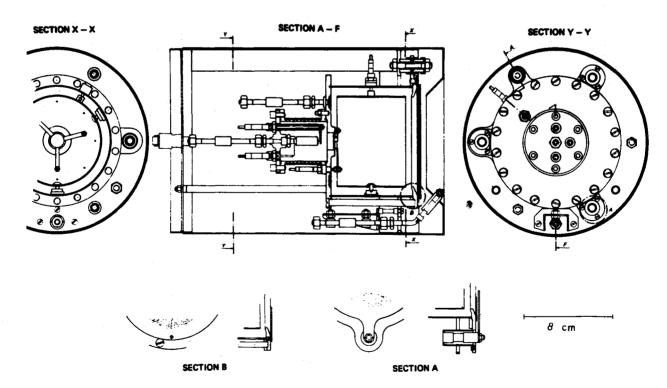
Schematic drawing of ion thruster ESKA 8.
